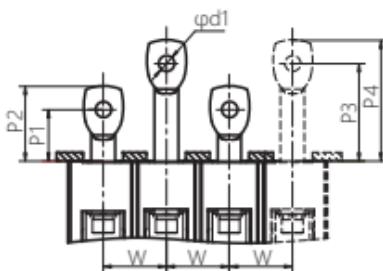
NXM-400~800 rear wiring overall and installation dimension
